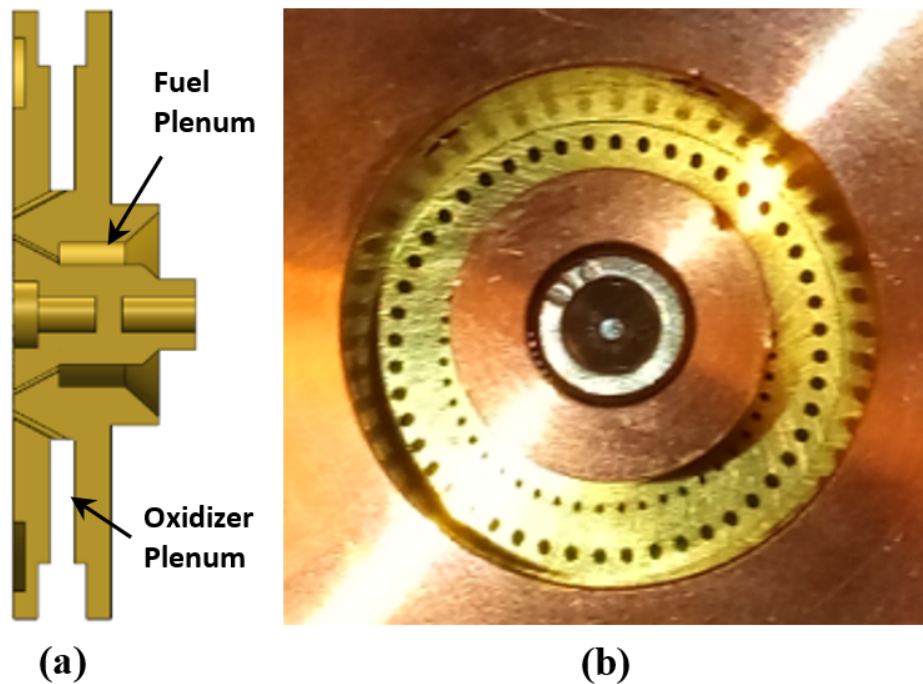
25.4 mm RDRE injector. a) Cross section. b) Photograph of installed injector. [4].
